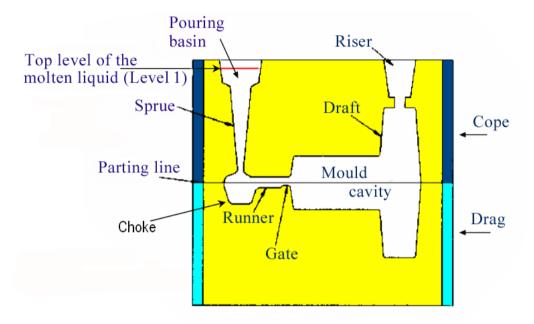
Sand mould for the casting process shown in Fig 3.2. [326, 329, 575]
